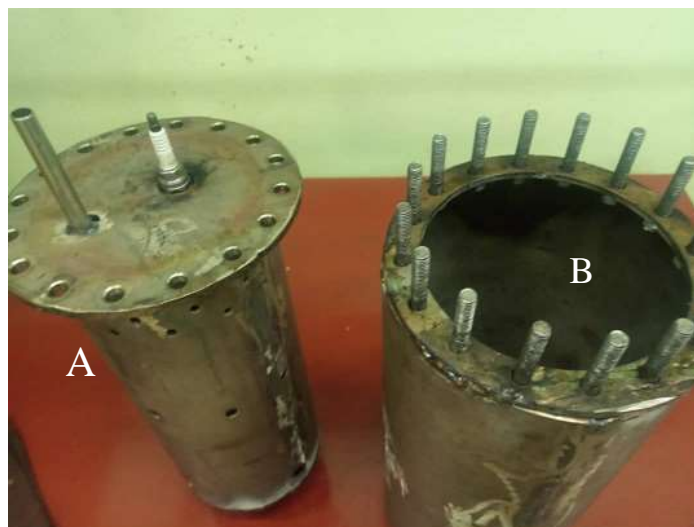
Base view of Inner (A) & Outer (B) Tubes
